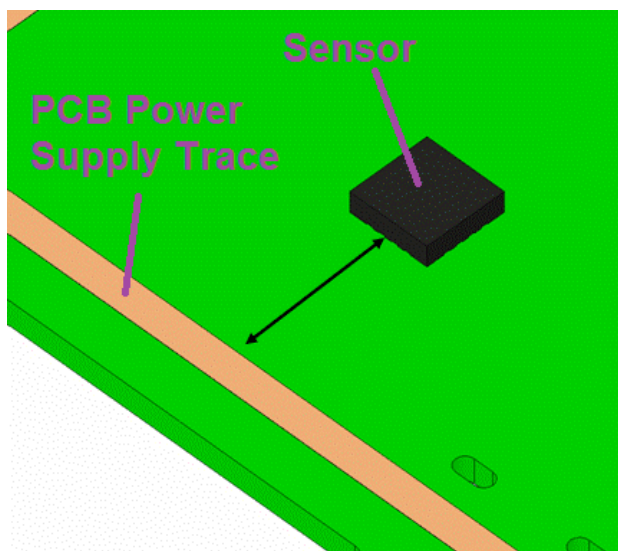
Sensor Placement Near PCB Power Supply Traces
